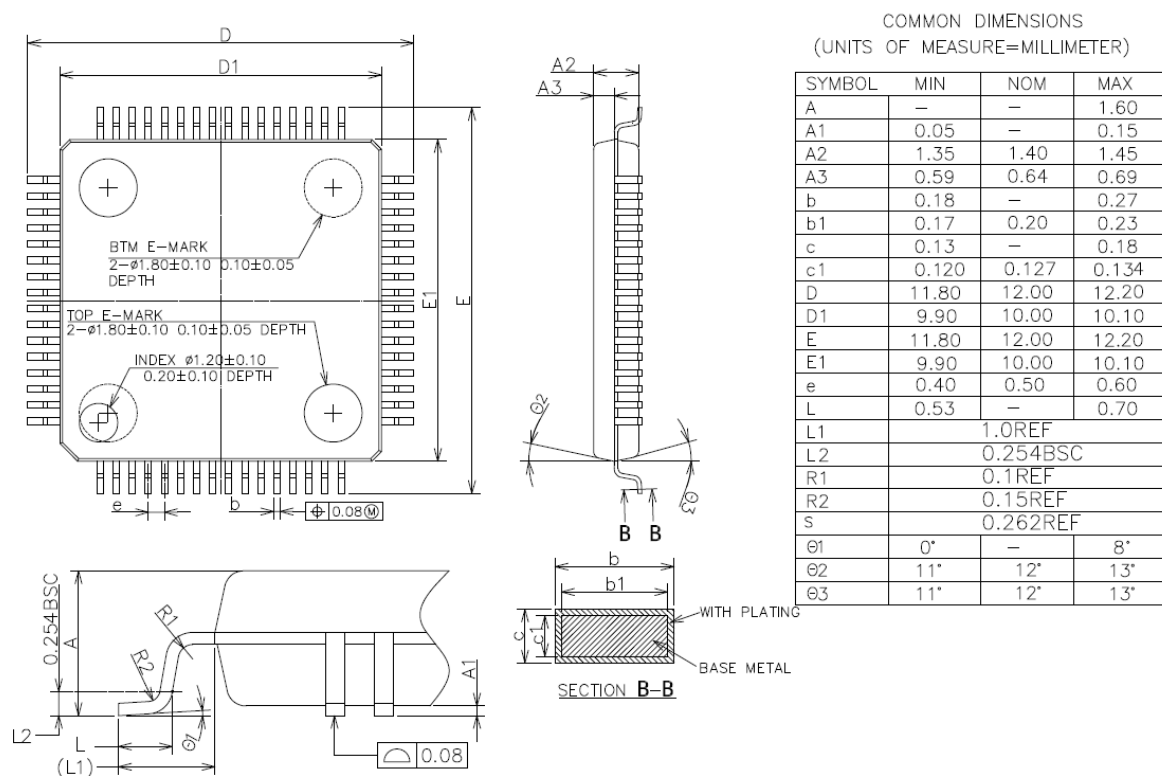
LQFP64 (10 \* 10 mm) Package Outline Drawing
